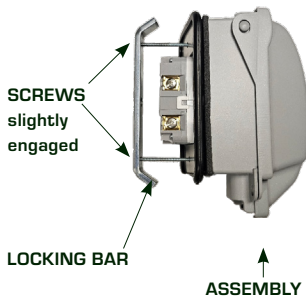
POSITION assembly diagonally and insert into handhole.
